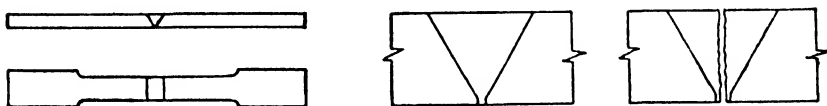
FAILURE OF BUTT WELD TEST PIECE WITH WELD GROUND FLUSH IF TENSILE STRENGTH OF WELD METAL IS LESS THAN THAT OF PLATE
